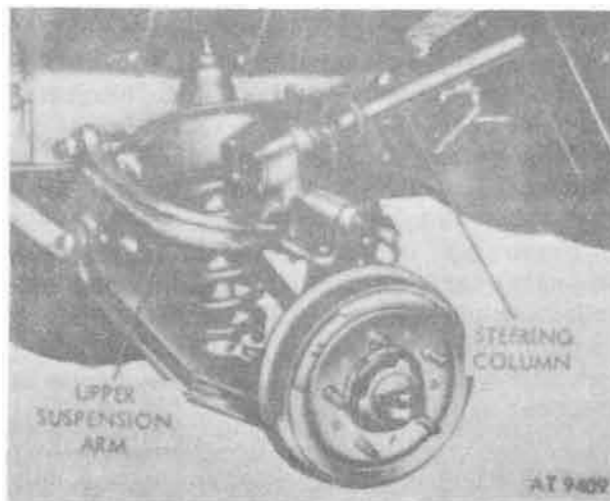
Left front suspension and steering gear assembly (M151, M151A1, M151A1C, and M718 vehicles).
